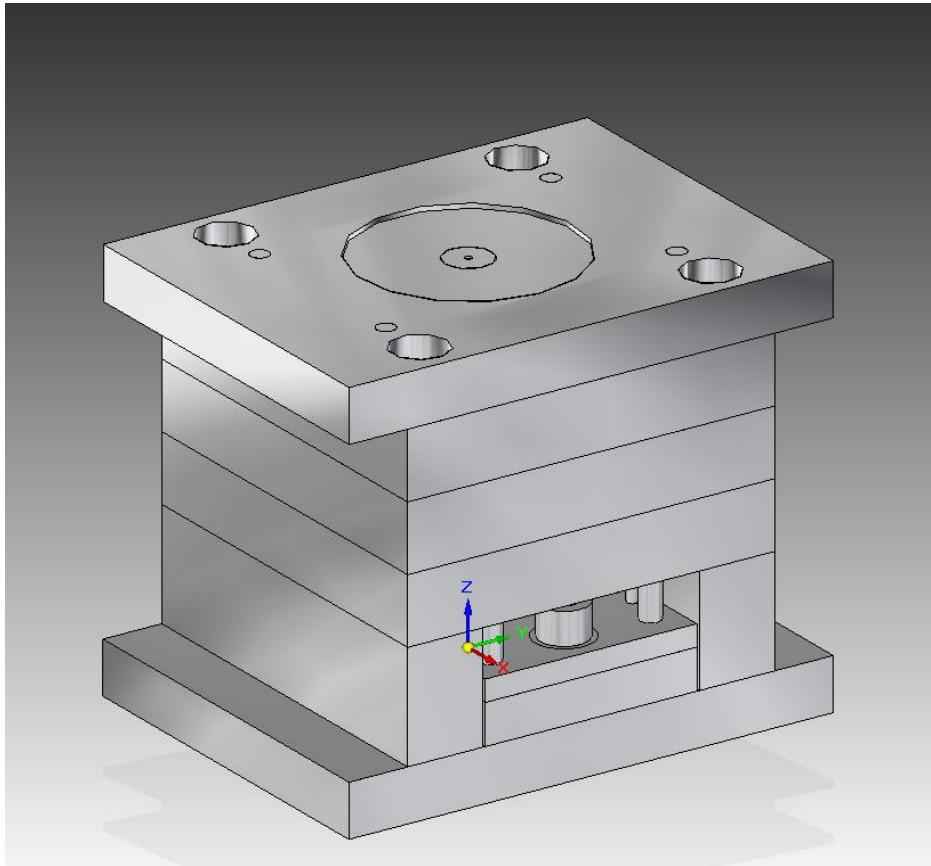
Screenshot of spiral flow testing mould designed on  $156 * 156 \text{ mm}^2$  mould plate
